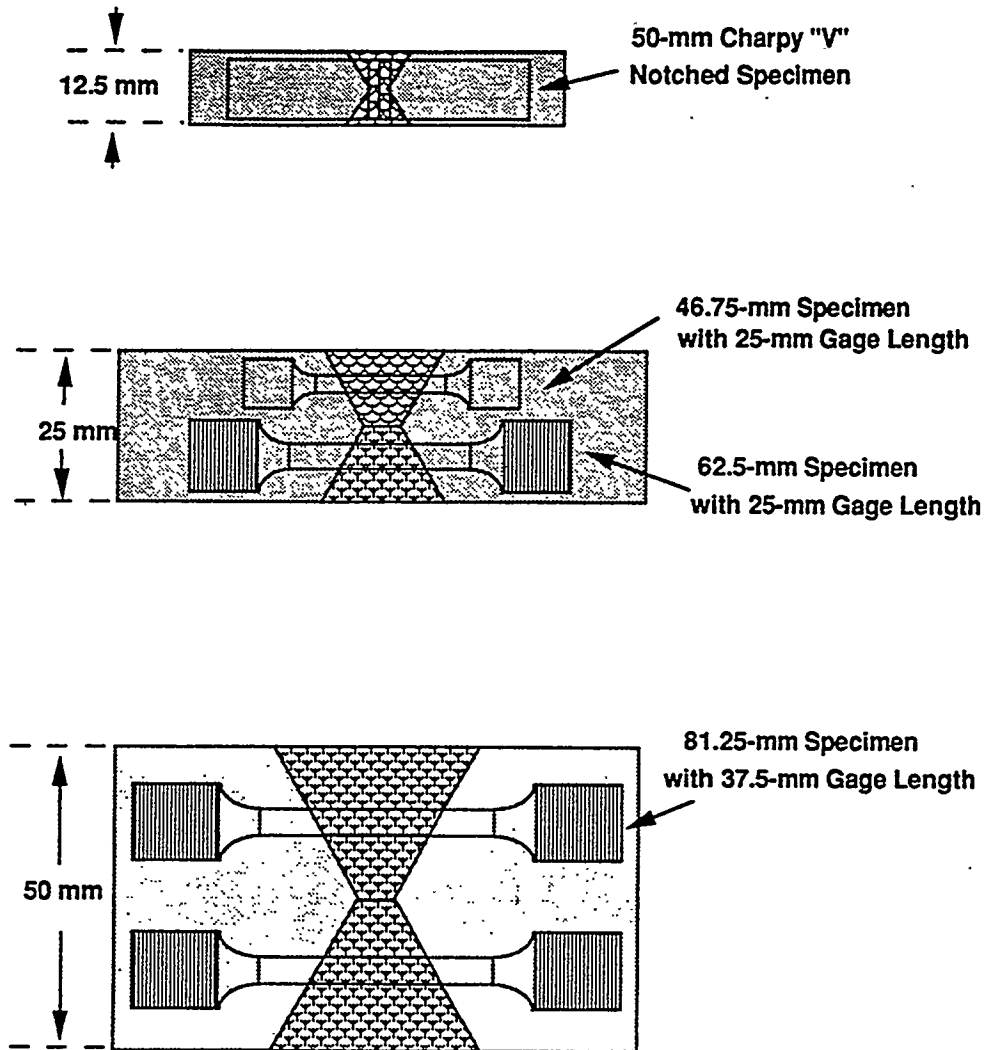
Schematic showing the location and size of mechanical property specimens machined from welded slabs of FAPY alloy.
